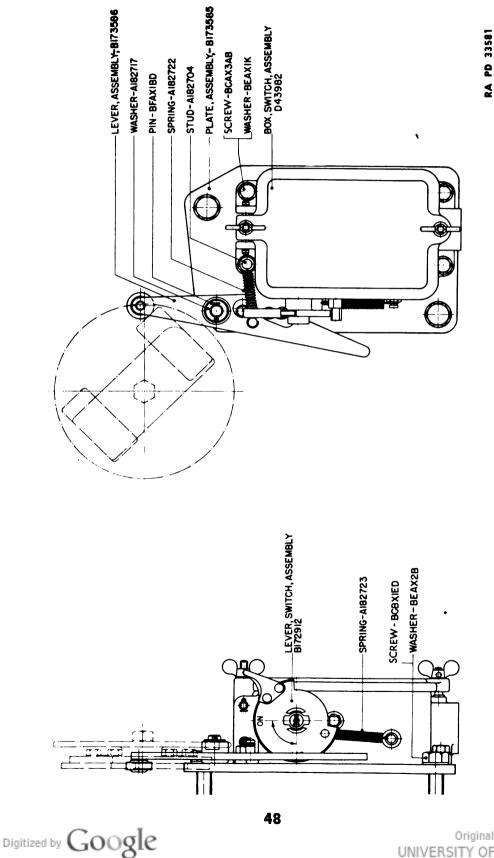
Limit Switch (Elevation) Assembly—Assembled Views
